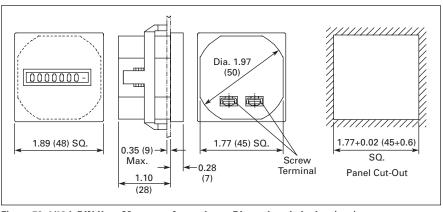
1/16th DIN Hour Meters — Approximate Dimensions in Inches (mm)
